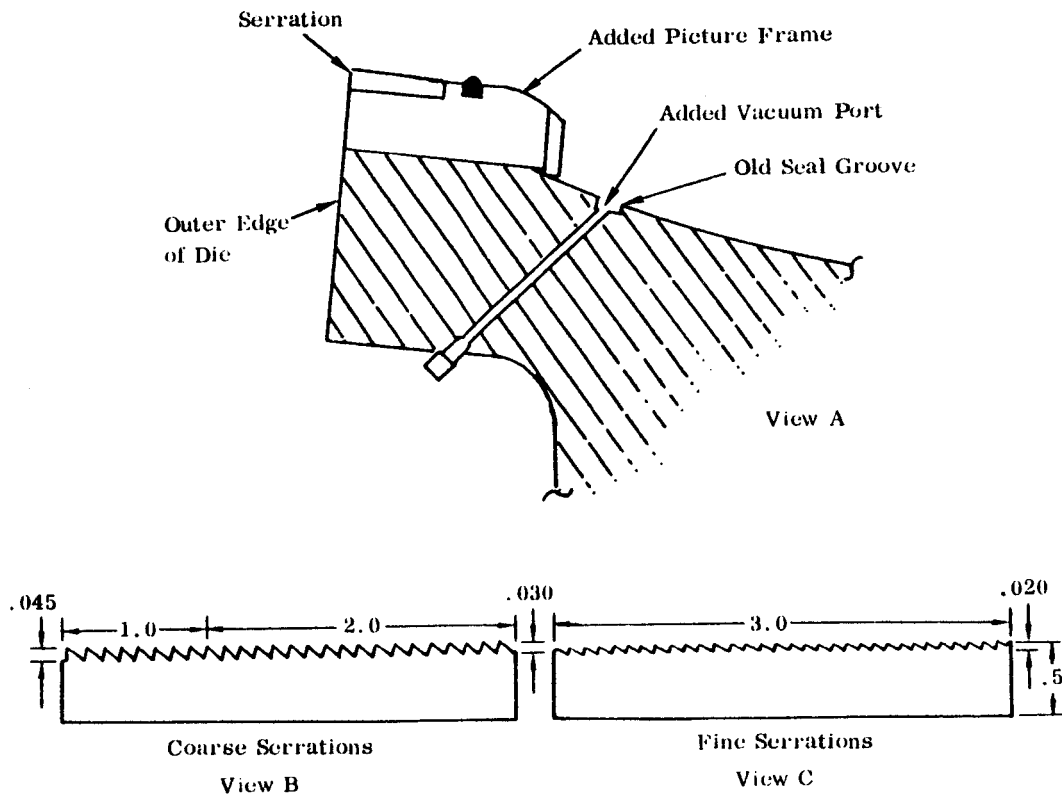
Typical Cross Section of Die Edge Showing Picture Frame Shim & Serrations
